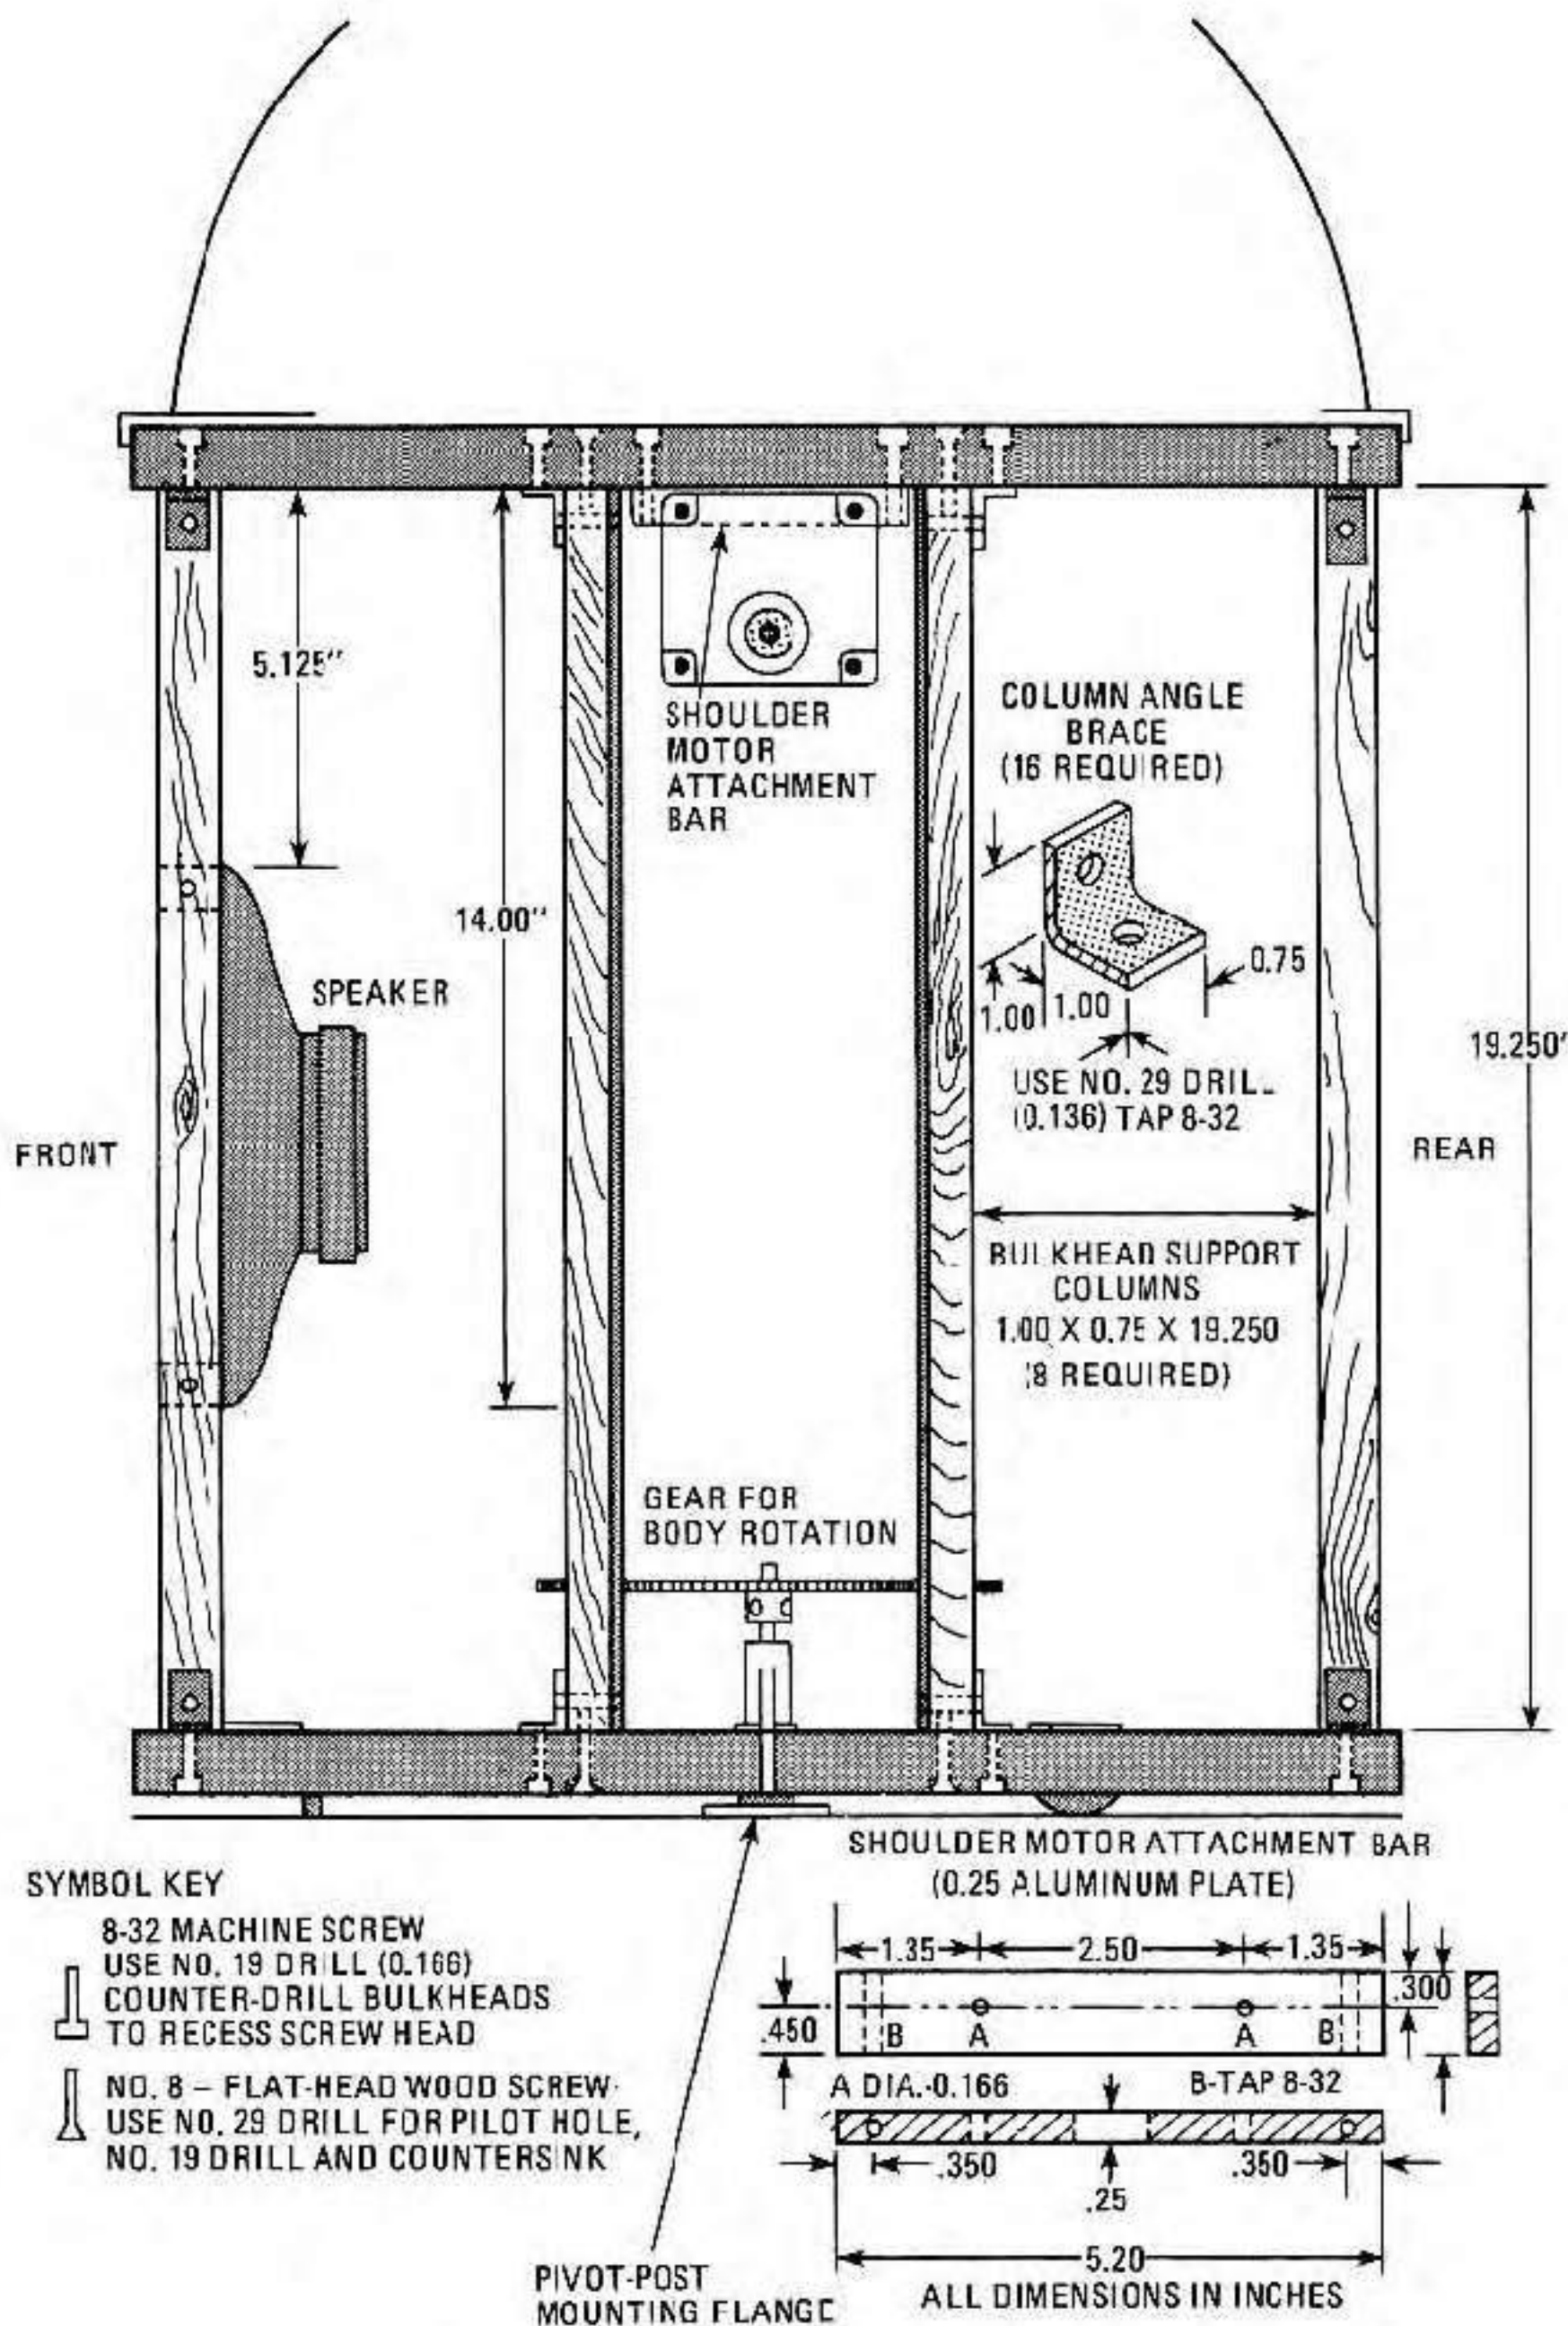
ROBOT BODY supporting structure is of wooden construction. Note pivot-post mounting flange and ball-bearing wheels beneath the bottom bulkhead.
